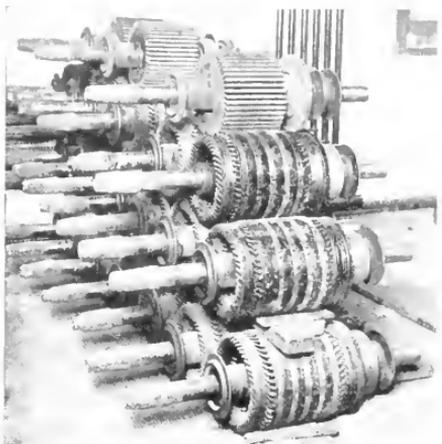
Worn Armature Shafts Built up by General Electric Constant Energy Welding Machine, Showing One Armature Shaft Machined
